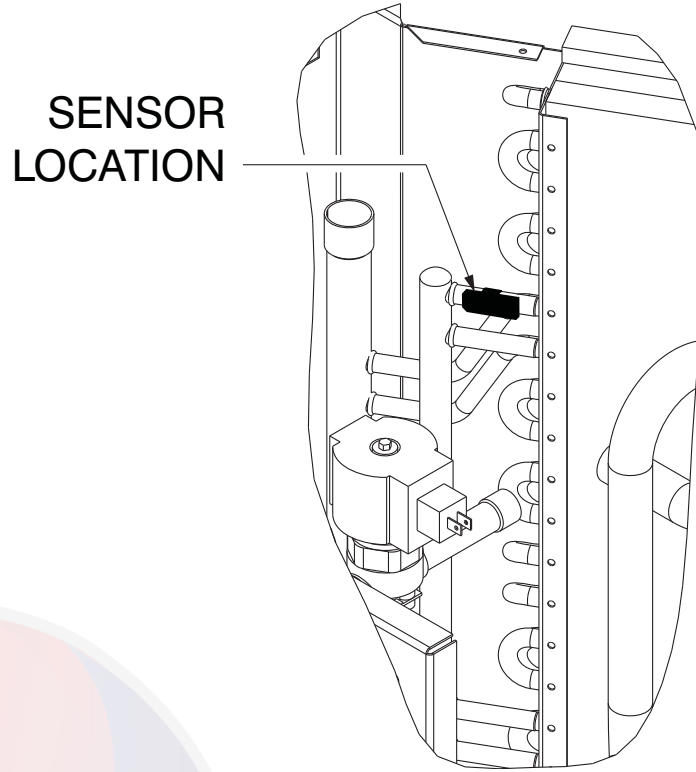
Motormaster Sensor Locations – D17, D20, and D24
